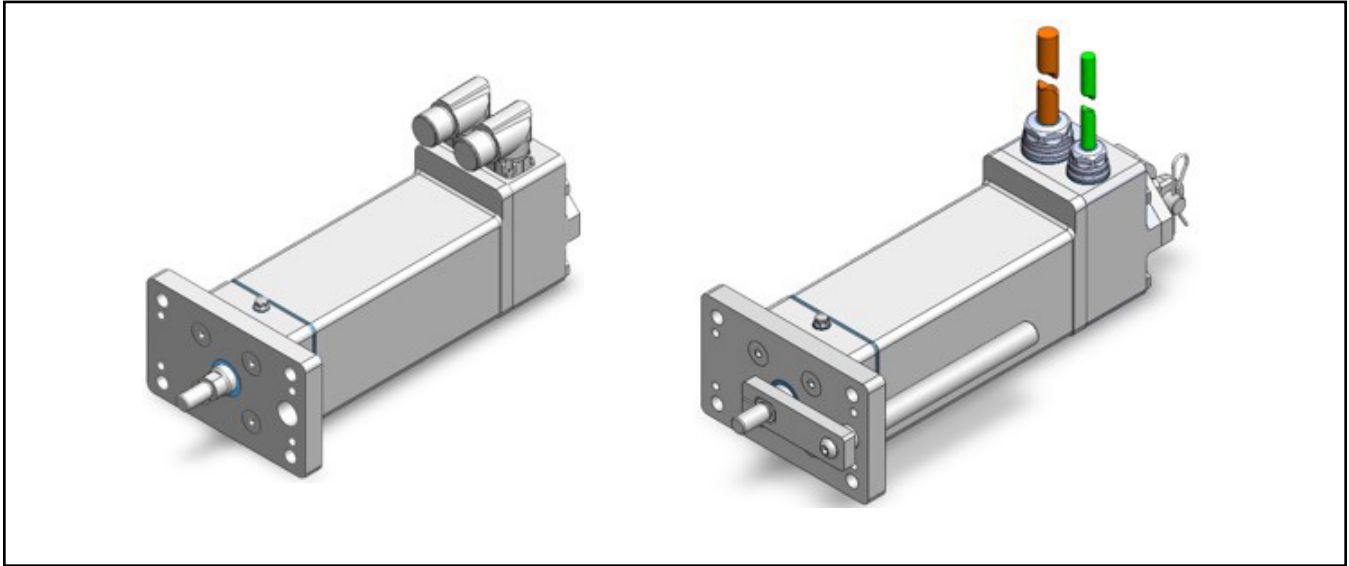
Front flange mount configuration and front flange mount with option anti-rotate assembly
